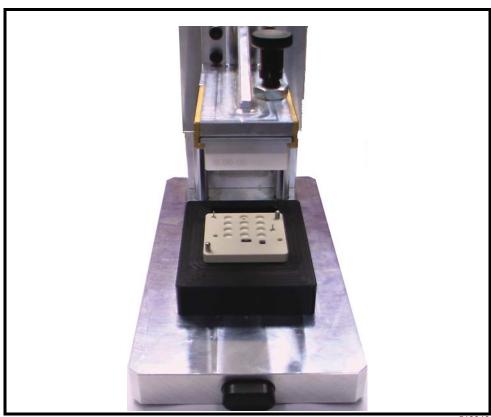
Z6m/Z6tv EL Alignment and Press Tool
